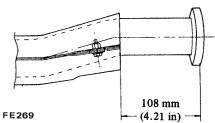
Mounting position of exhaust front tube heat shield plate
